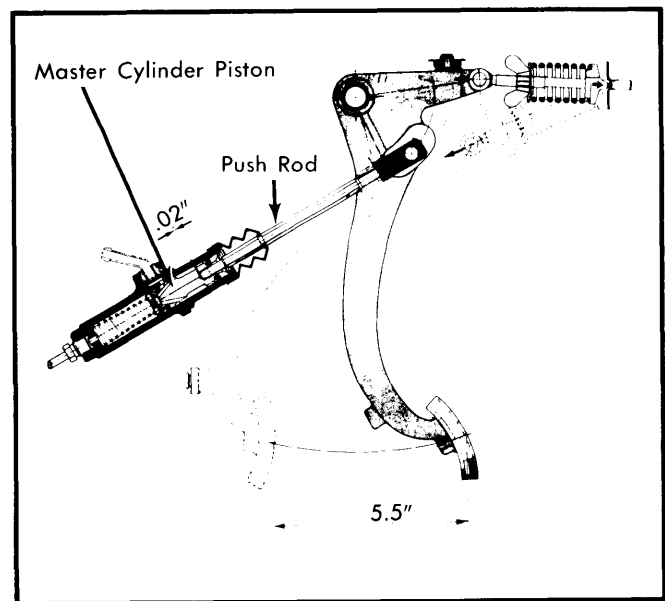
924 Turbo & 928 Clutch Push Rod Adjustment
